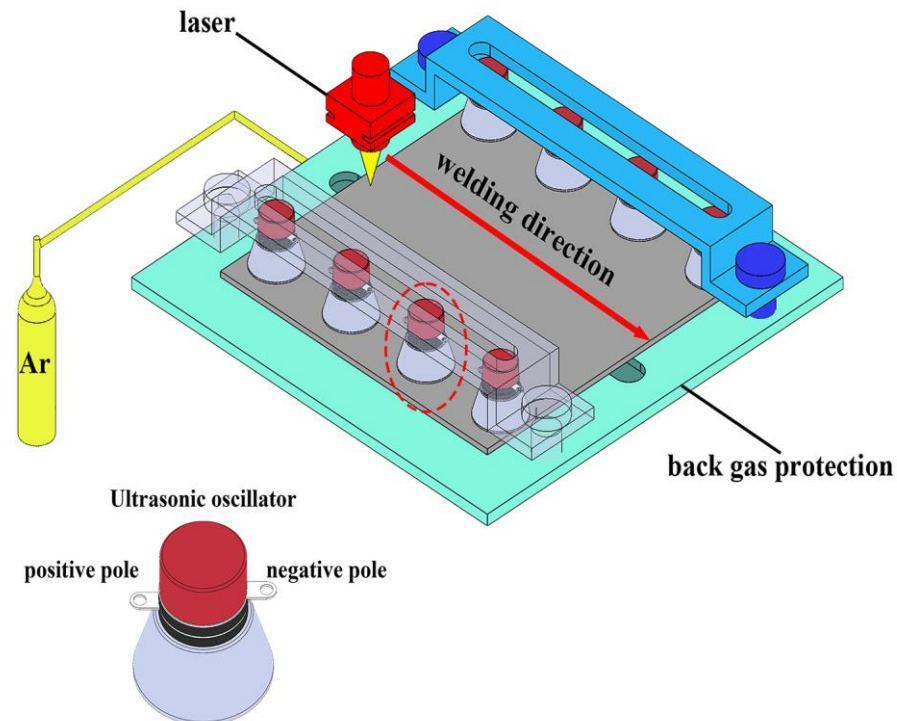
Schematic diagram of multi-vibrator ultrasonic-assisted welding.
